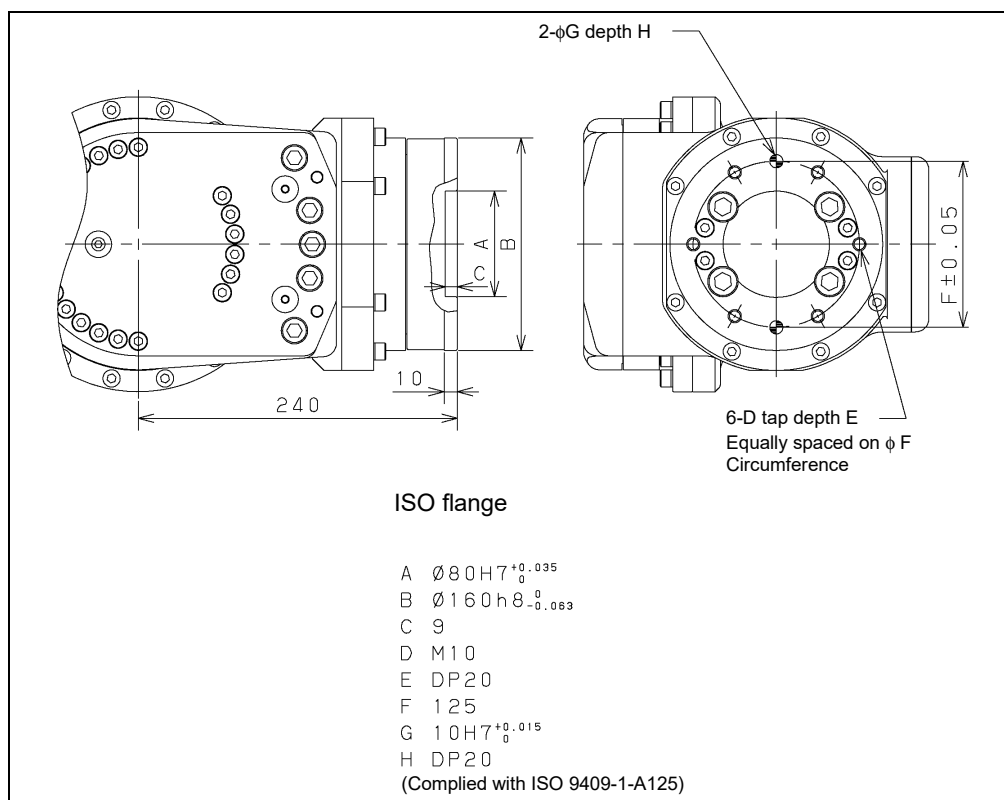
(k) End effector mounting face (ISO flange) (R-2000iB/165CF)
